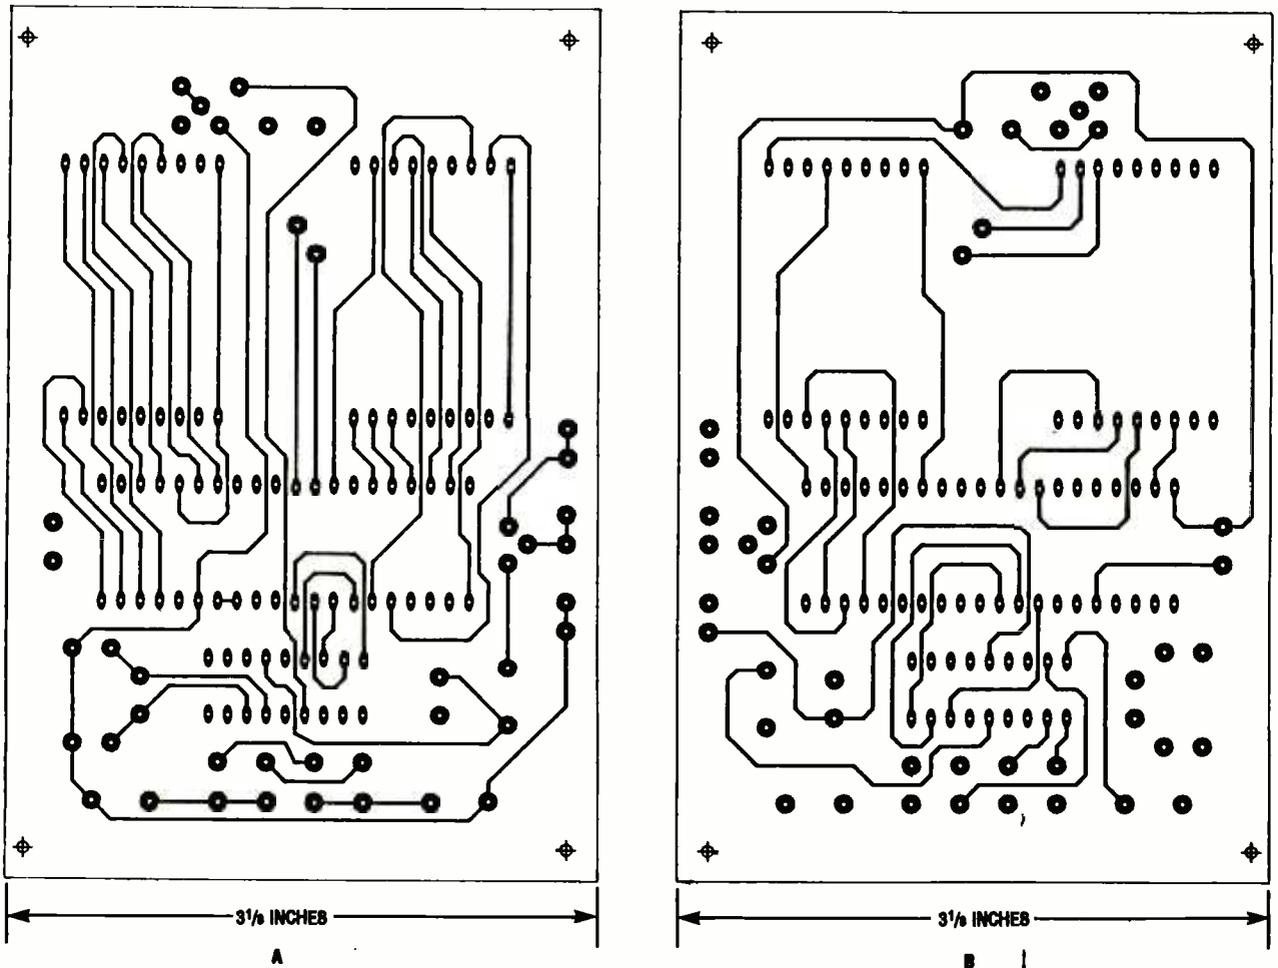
The Electronic Casino was assembled on a compact, double-sided printed-circuit board, both sides of which are shown here full size; "A" is the solder side of the board, and "B" is the component side of the board.
